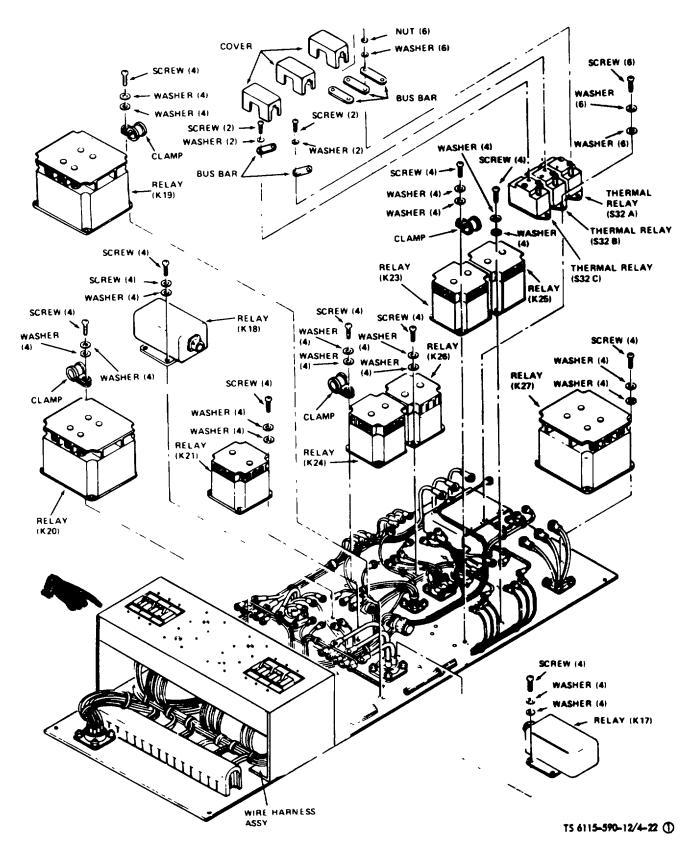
(1). Conditioned Air System Circuit Breaker and Control Panel Component Replacement (Sheet 1 of 3) (TS 6115-59012/4-221)
